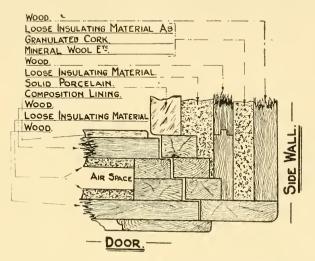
TYPICAL REFRIGERATOR WALL AND DOOR CONSTRUCTION.
